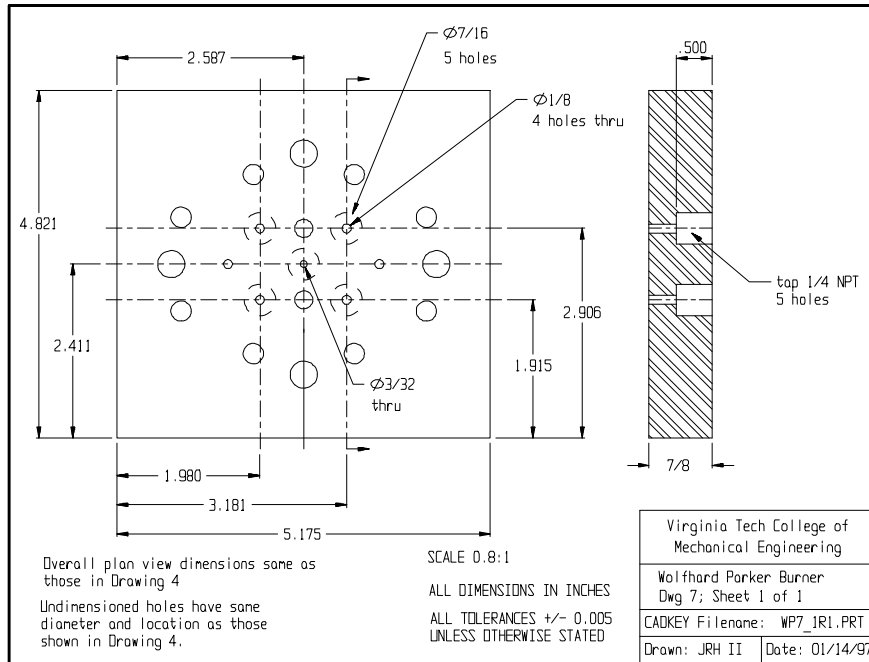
Burner Gas Inlet Manifold, Drawing 7 Sheet 1 of 1
